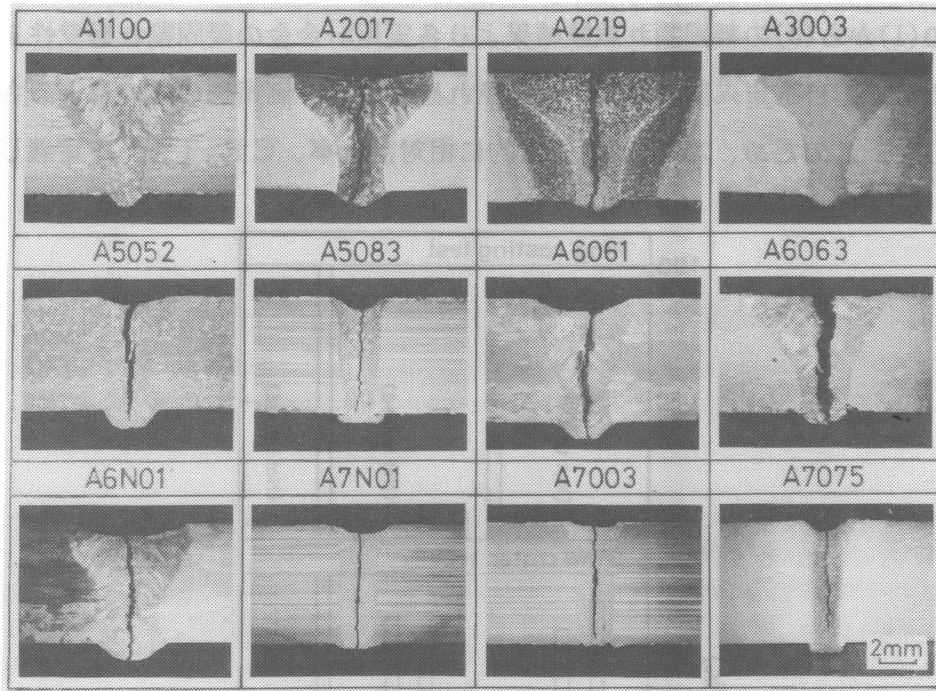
Crosssectional macrostructures of Fan-shaped test specimen.
